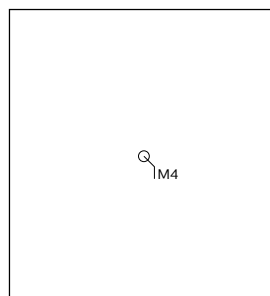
Mounting hole pattern for Fortimo FastFlex 2x2 DA.
